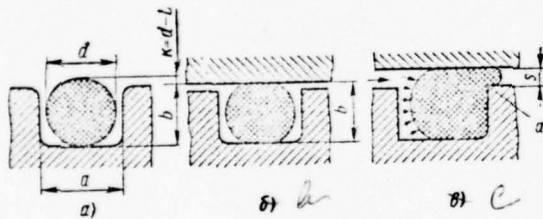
Diagrams of packing/seals by the rubber ring of round cross-section.  $\Pi$  The size/dimensions of rings and grooves in piston are selected by such that during the assembly of rings in groove (with zero reduction) would be preserved the side clearance, equal to 0.2-0.25 mm. width  $b$  (Fig. 202a) of ring is usually equal to 3-5 mm height/altitude  $h$  was equal to 5-8 mm.
